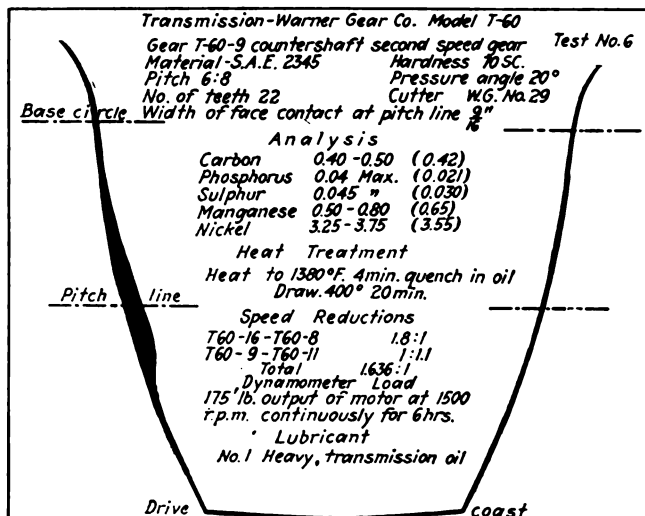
WEAR OF A COUNTERSHAFT GEAR
